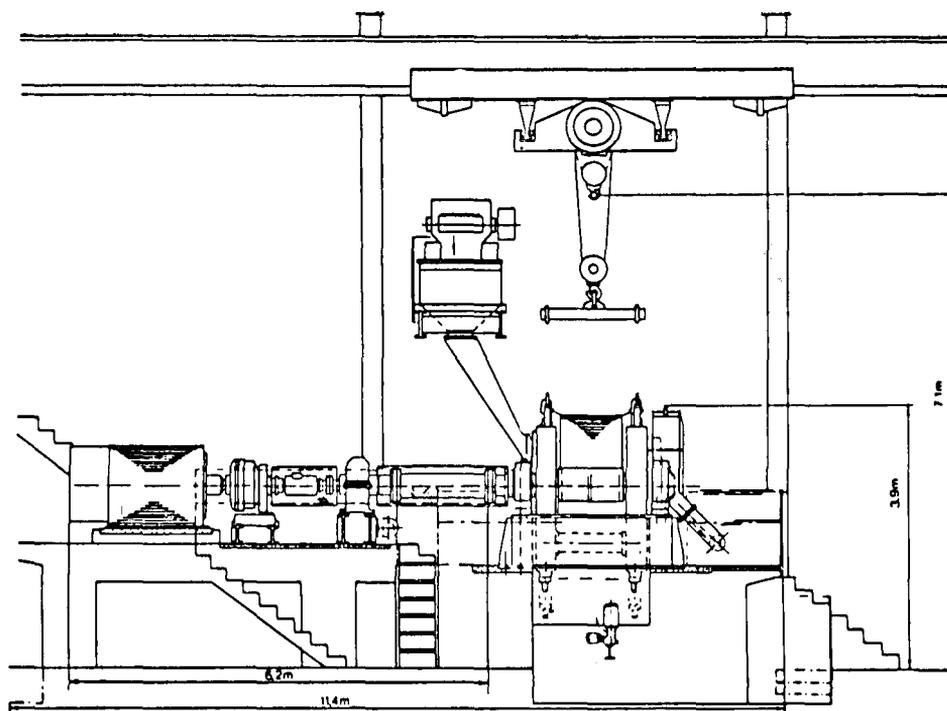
A view of the proposed 1 MW centrifugal mill. The drive is on the left and the mill tube is below the crane in the centre
